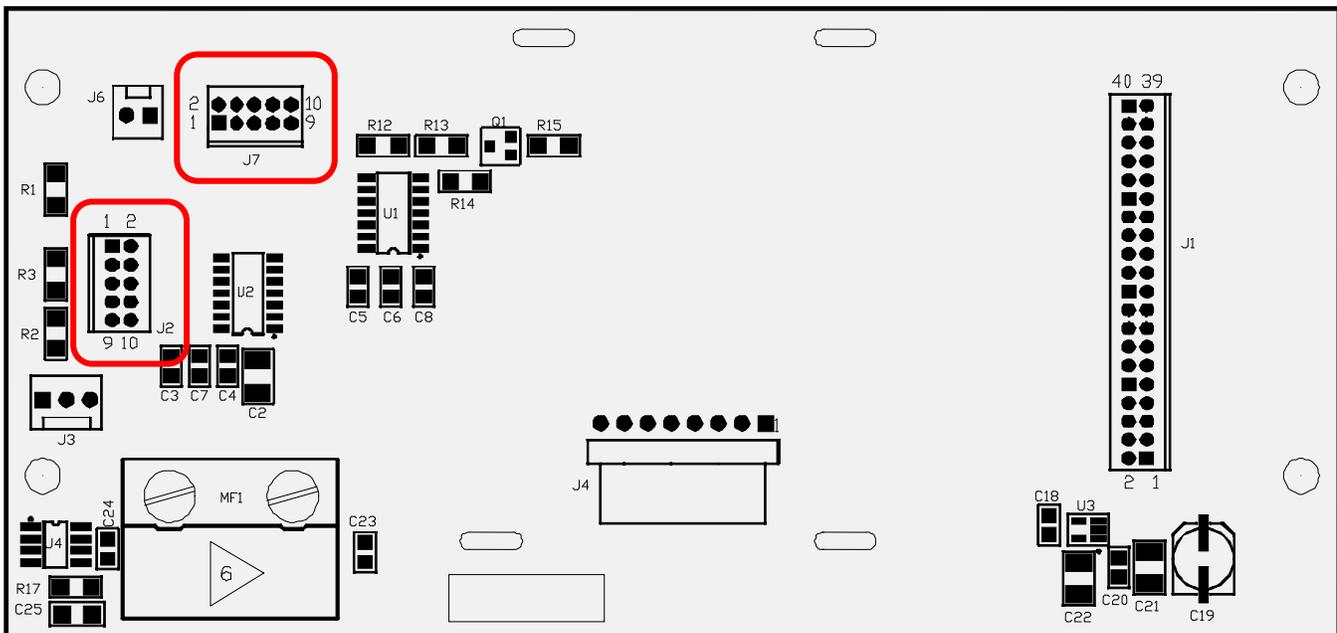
Front Panel Printed Circuit Board Containing Probe Connectors J2 and J7
